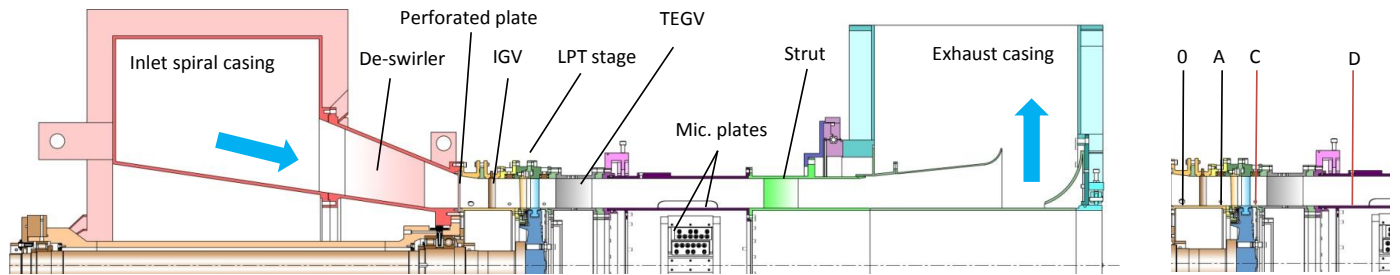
Meridional section of the STTF-AAAI (left) and measurement planes (right)
